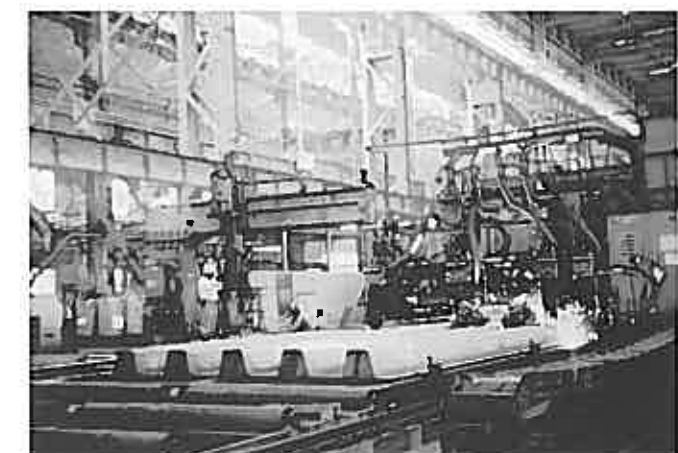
A typical automation of fillet welding by employing line welders for U-rib-to-flange joints of box girders, using DW-200
